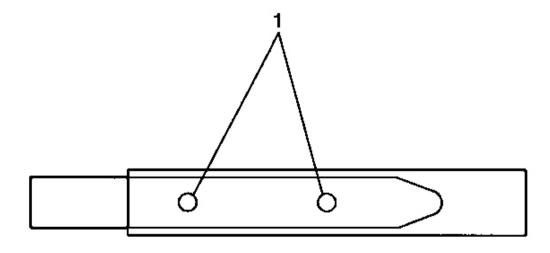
Inspecting Steering Shaft For Sheared Injected Plastic Courtesy of GENERAL MOTORS CORP.
